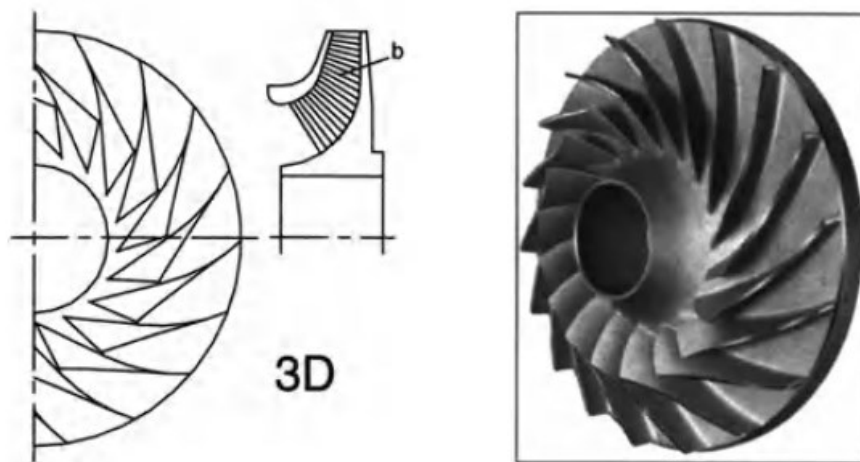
Covered 3D-impeller with twisted backward-curved blades. The photo was taken before the cover was brazed on the impeller [5].
